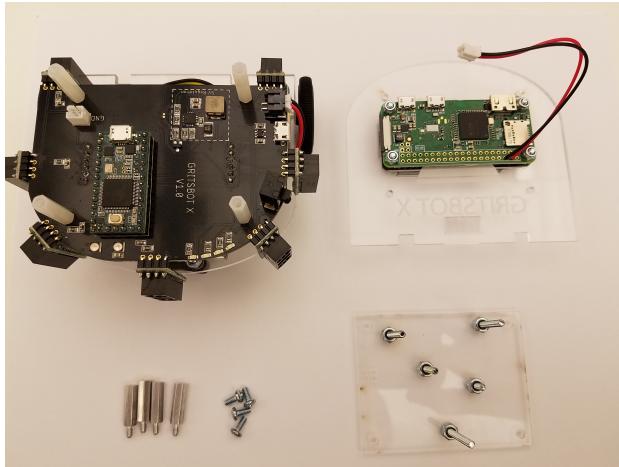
The parts required to attach the chassis cover to the base of the GRITSBot X.
